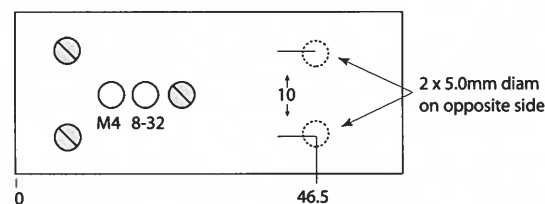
Location of M4 and 8-32 mounting holes, and suggested location of photodiode holes for vertical mounting.
